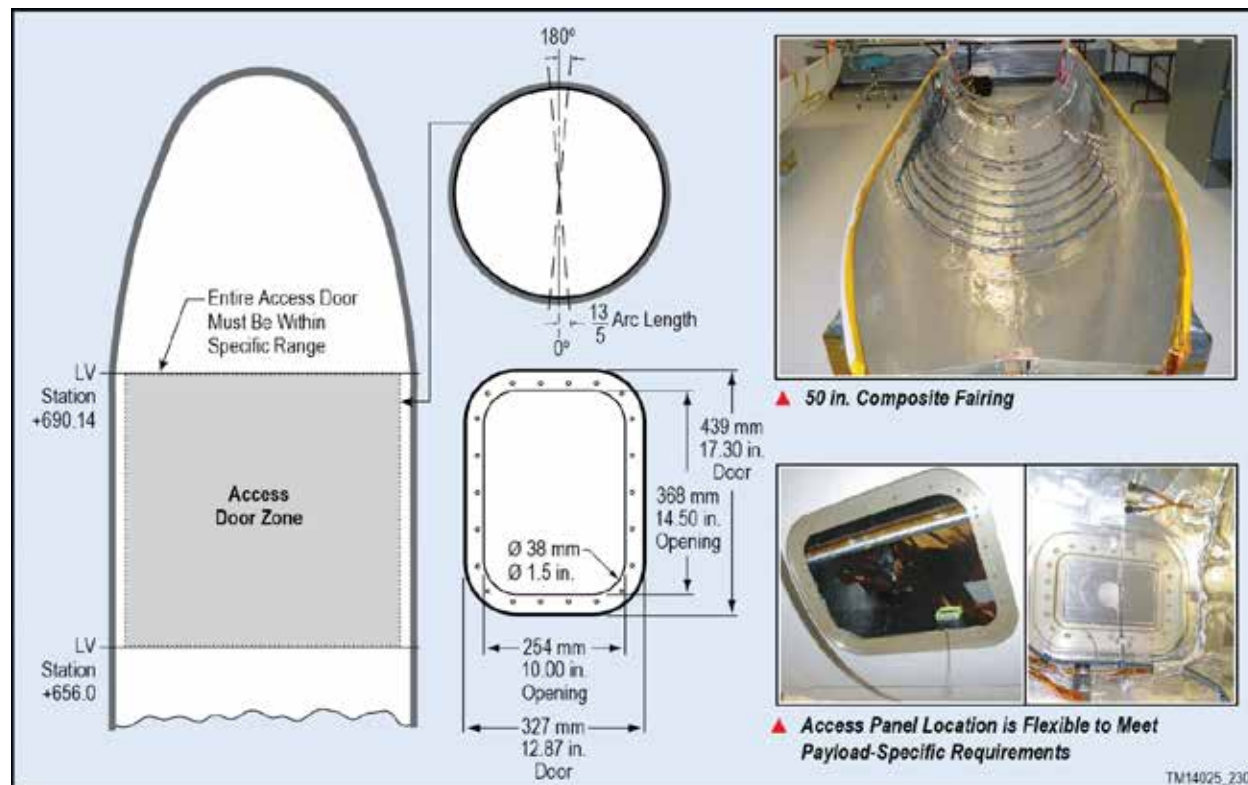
50'' Payload Fairing Access Door Placement Zone
